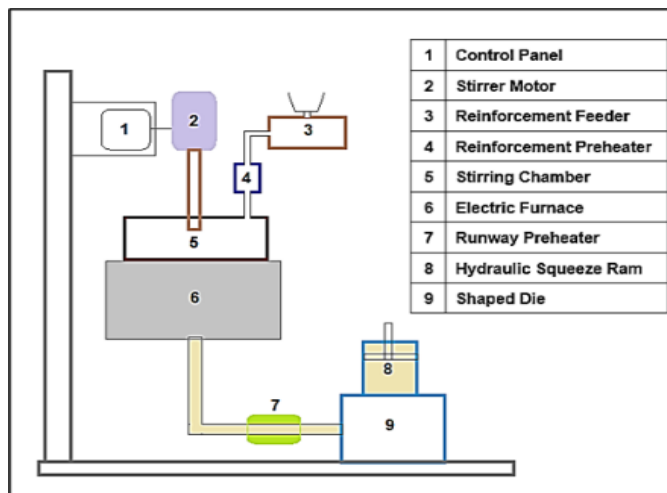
Cross-Sectional View of the Stir Squeeze Casting Machine.
